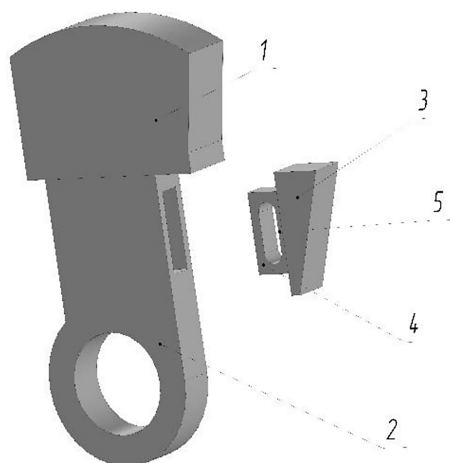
Hammer [86]: 1 – side part; 2 – hammer handle; 3 – protective part of the handle; 4 – jack; 5 – waist-type hole
